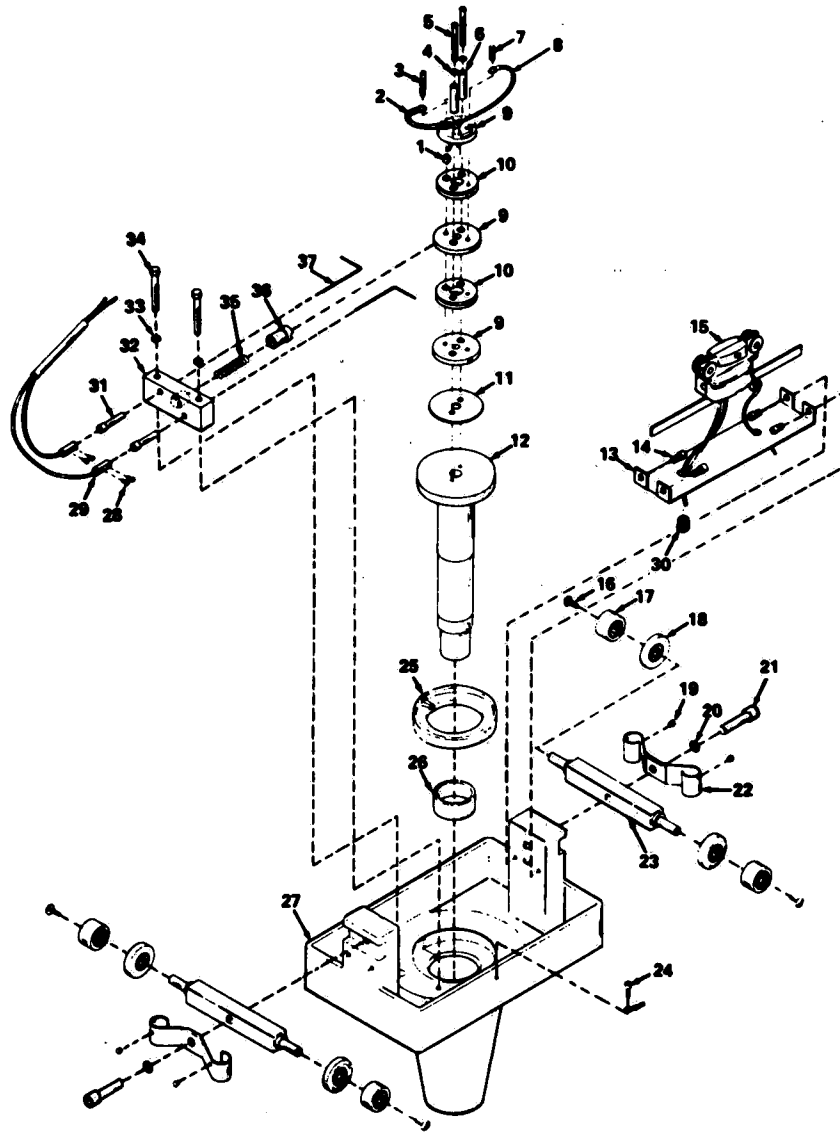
CARRIAGE ASSEMBLY, Units Shipped Before 3/73.
